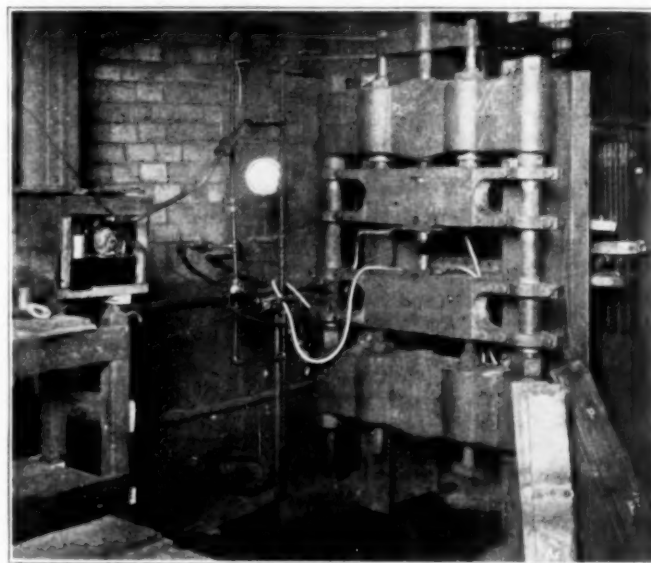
SPOT-WELDING MACHINE MADE BY GENERAL ELECTRIC CO. CURRENT CAPACITY, 100,000 AMPERES; PRESSURE, 36 TONS
